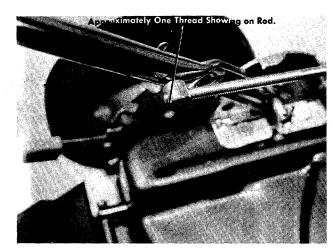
FIGURE G. CLUTCH ROD SETTING FOR THE LOWEST CUTTING HEIGHT.
